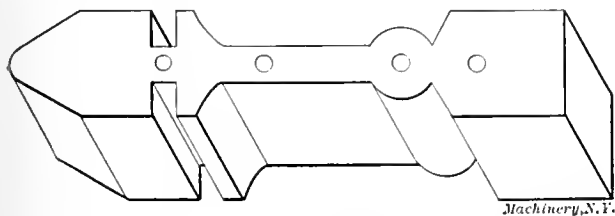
A Die in which the Outer Edges are used for Shearing the Metal when Blanking
